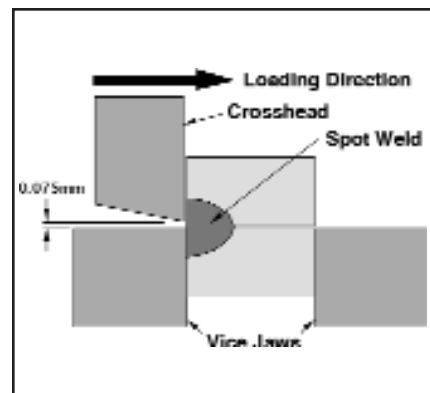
Schematic diagram of laser beam spot weld shear test.
